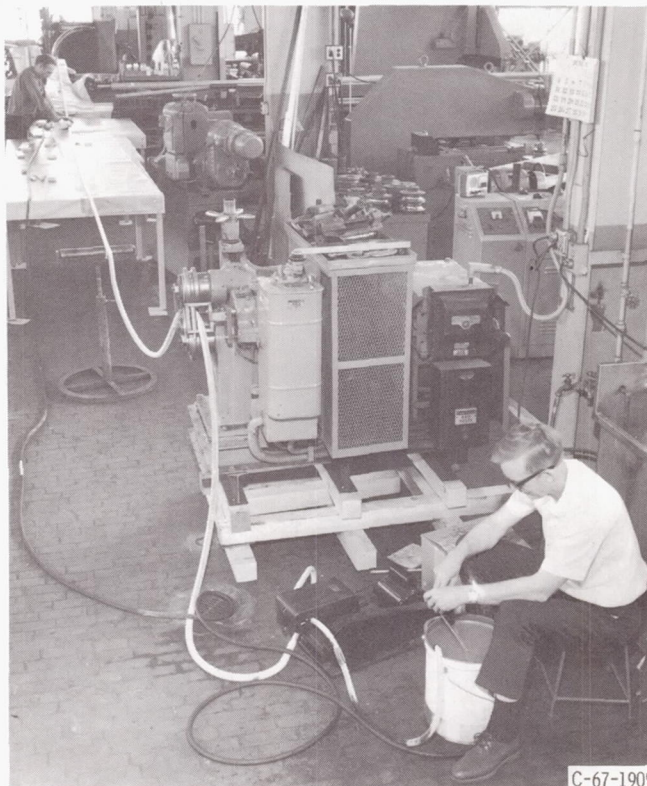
Electron beam welder just after completion of tantalum tube butt-weld.
